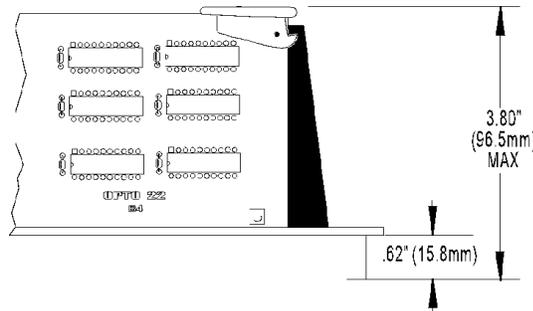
Vertical Dimensions of the B4 Mounted on a Rack
